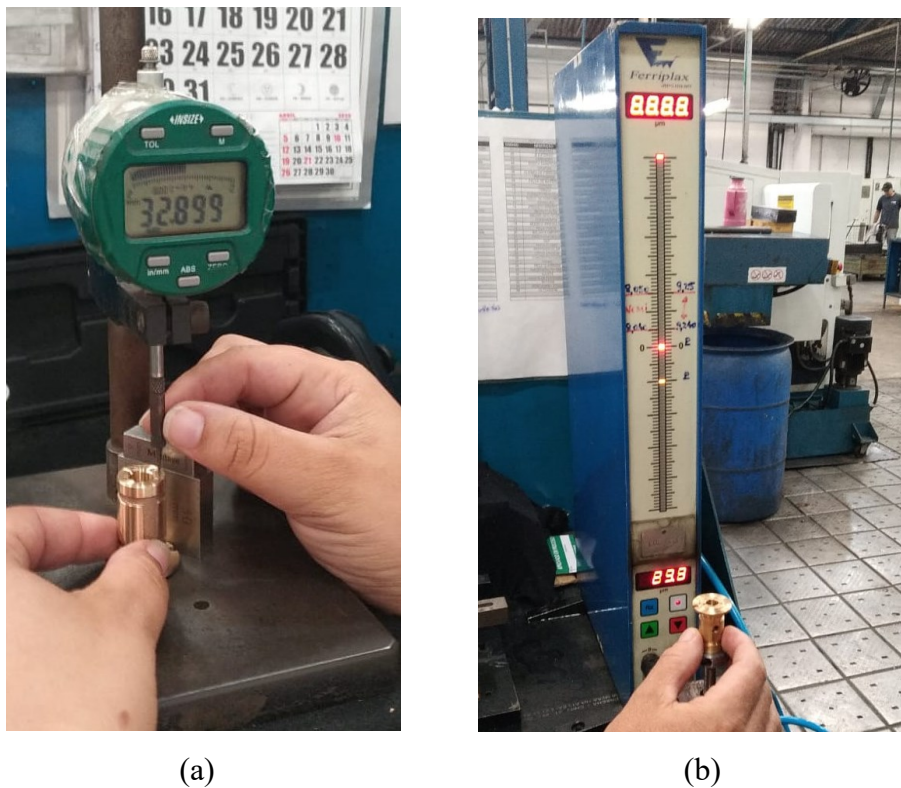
Metrology verification of final AUT1000 journal bearing: (a) Full length of double bearing; and (b) Bearing internal diameter
